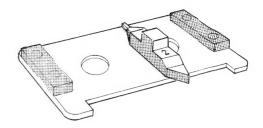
Tandberg Adjustment Plate with Tool No. 2.
